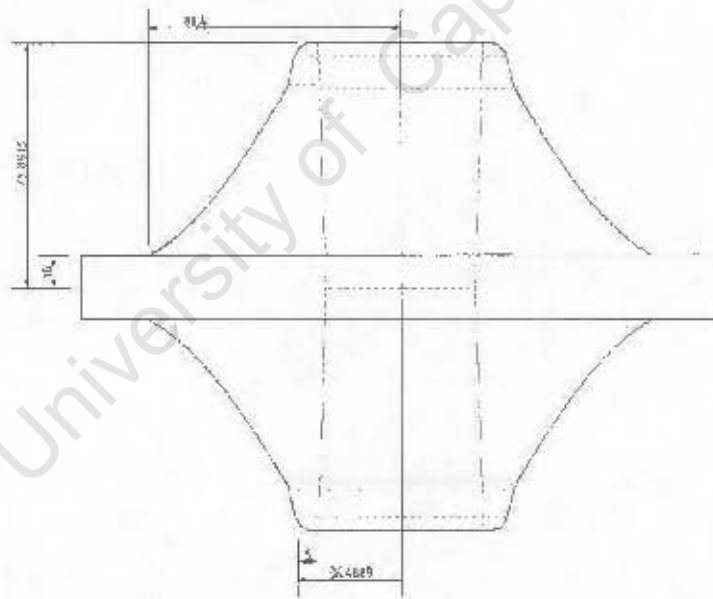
CAD DRAWING OF CLIMATE SHAPE 300 WH FIBRE GLASS COMPOSITE FLYWHEEL
